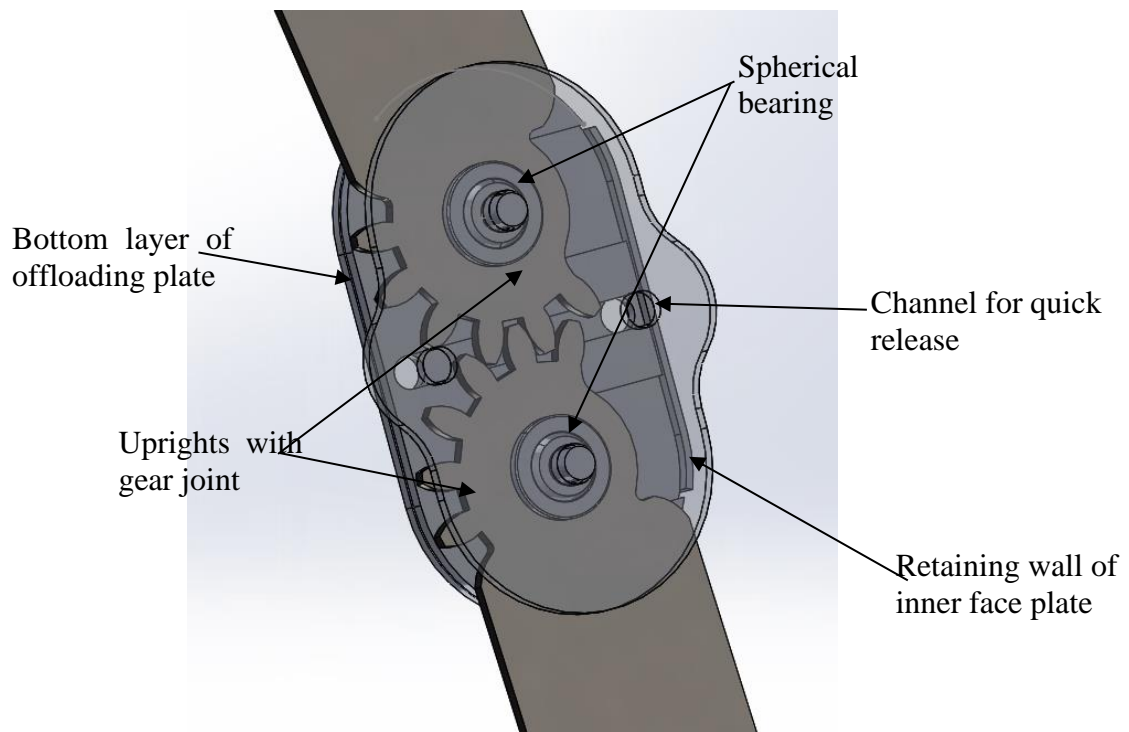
Joint with transparent faceplate and an invisible top layer of offloading plate, showing gear joint uprights, spherical bearings, and bottom of offloading plate. Quick-release mechanism not pictured.
